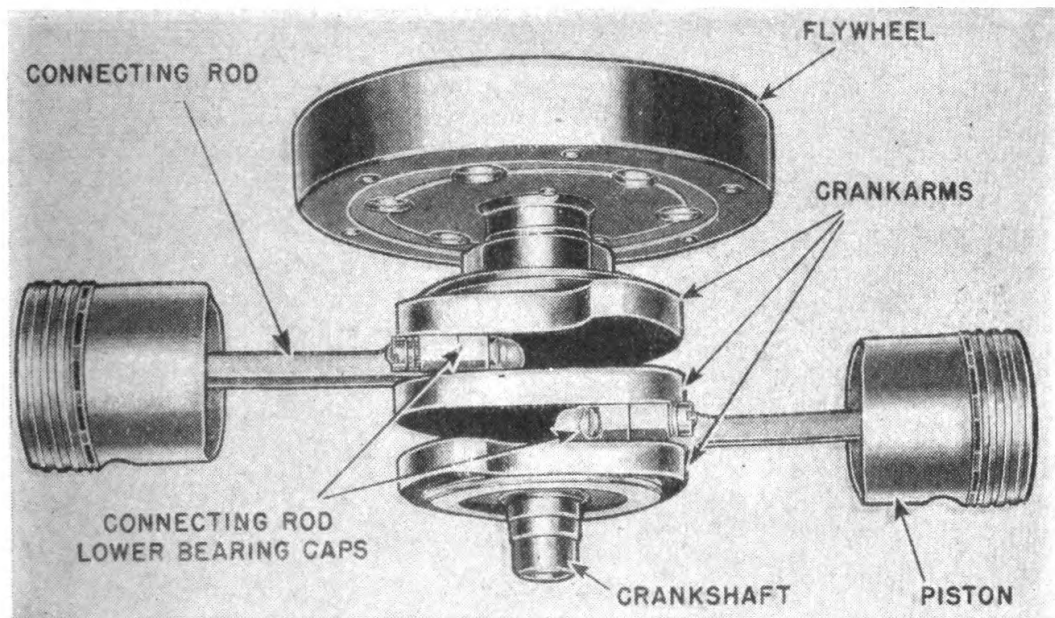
Connecting rod and flywheel assembly (Harley-Davidson).
